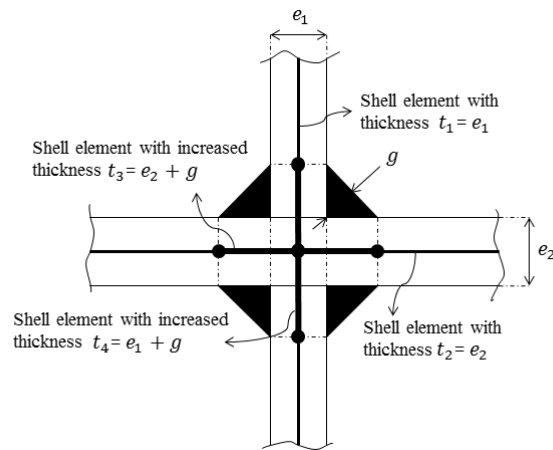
Modeling technique without weld geometrical representation [adapted from Eriksson and Lignell (2003)].
